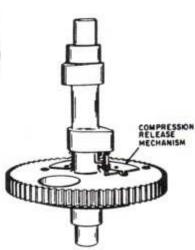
View of Insta-matic Ezee-Start compression release camshaft assembly used on all models except HH80, HH100 and HH120,
